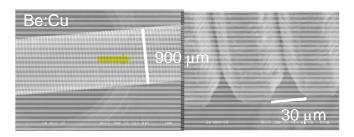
First example of a metawire fabricated using laser machining. Note the triangular shape of the grooves.
